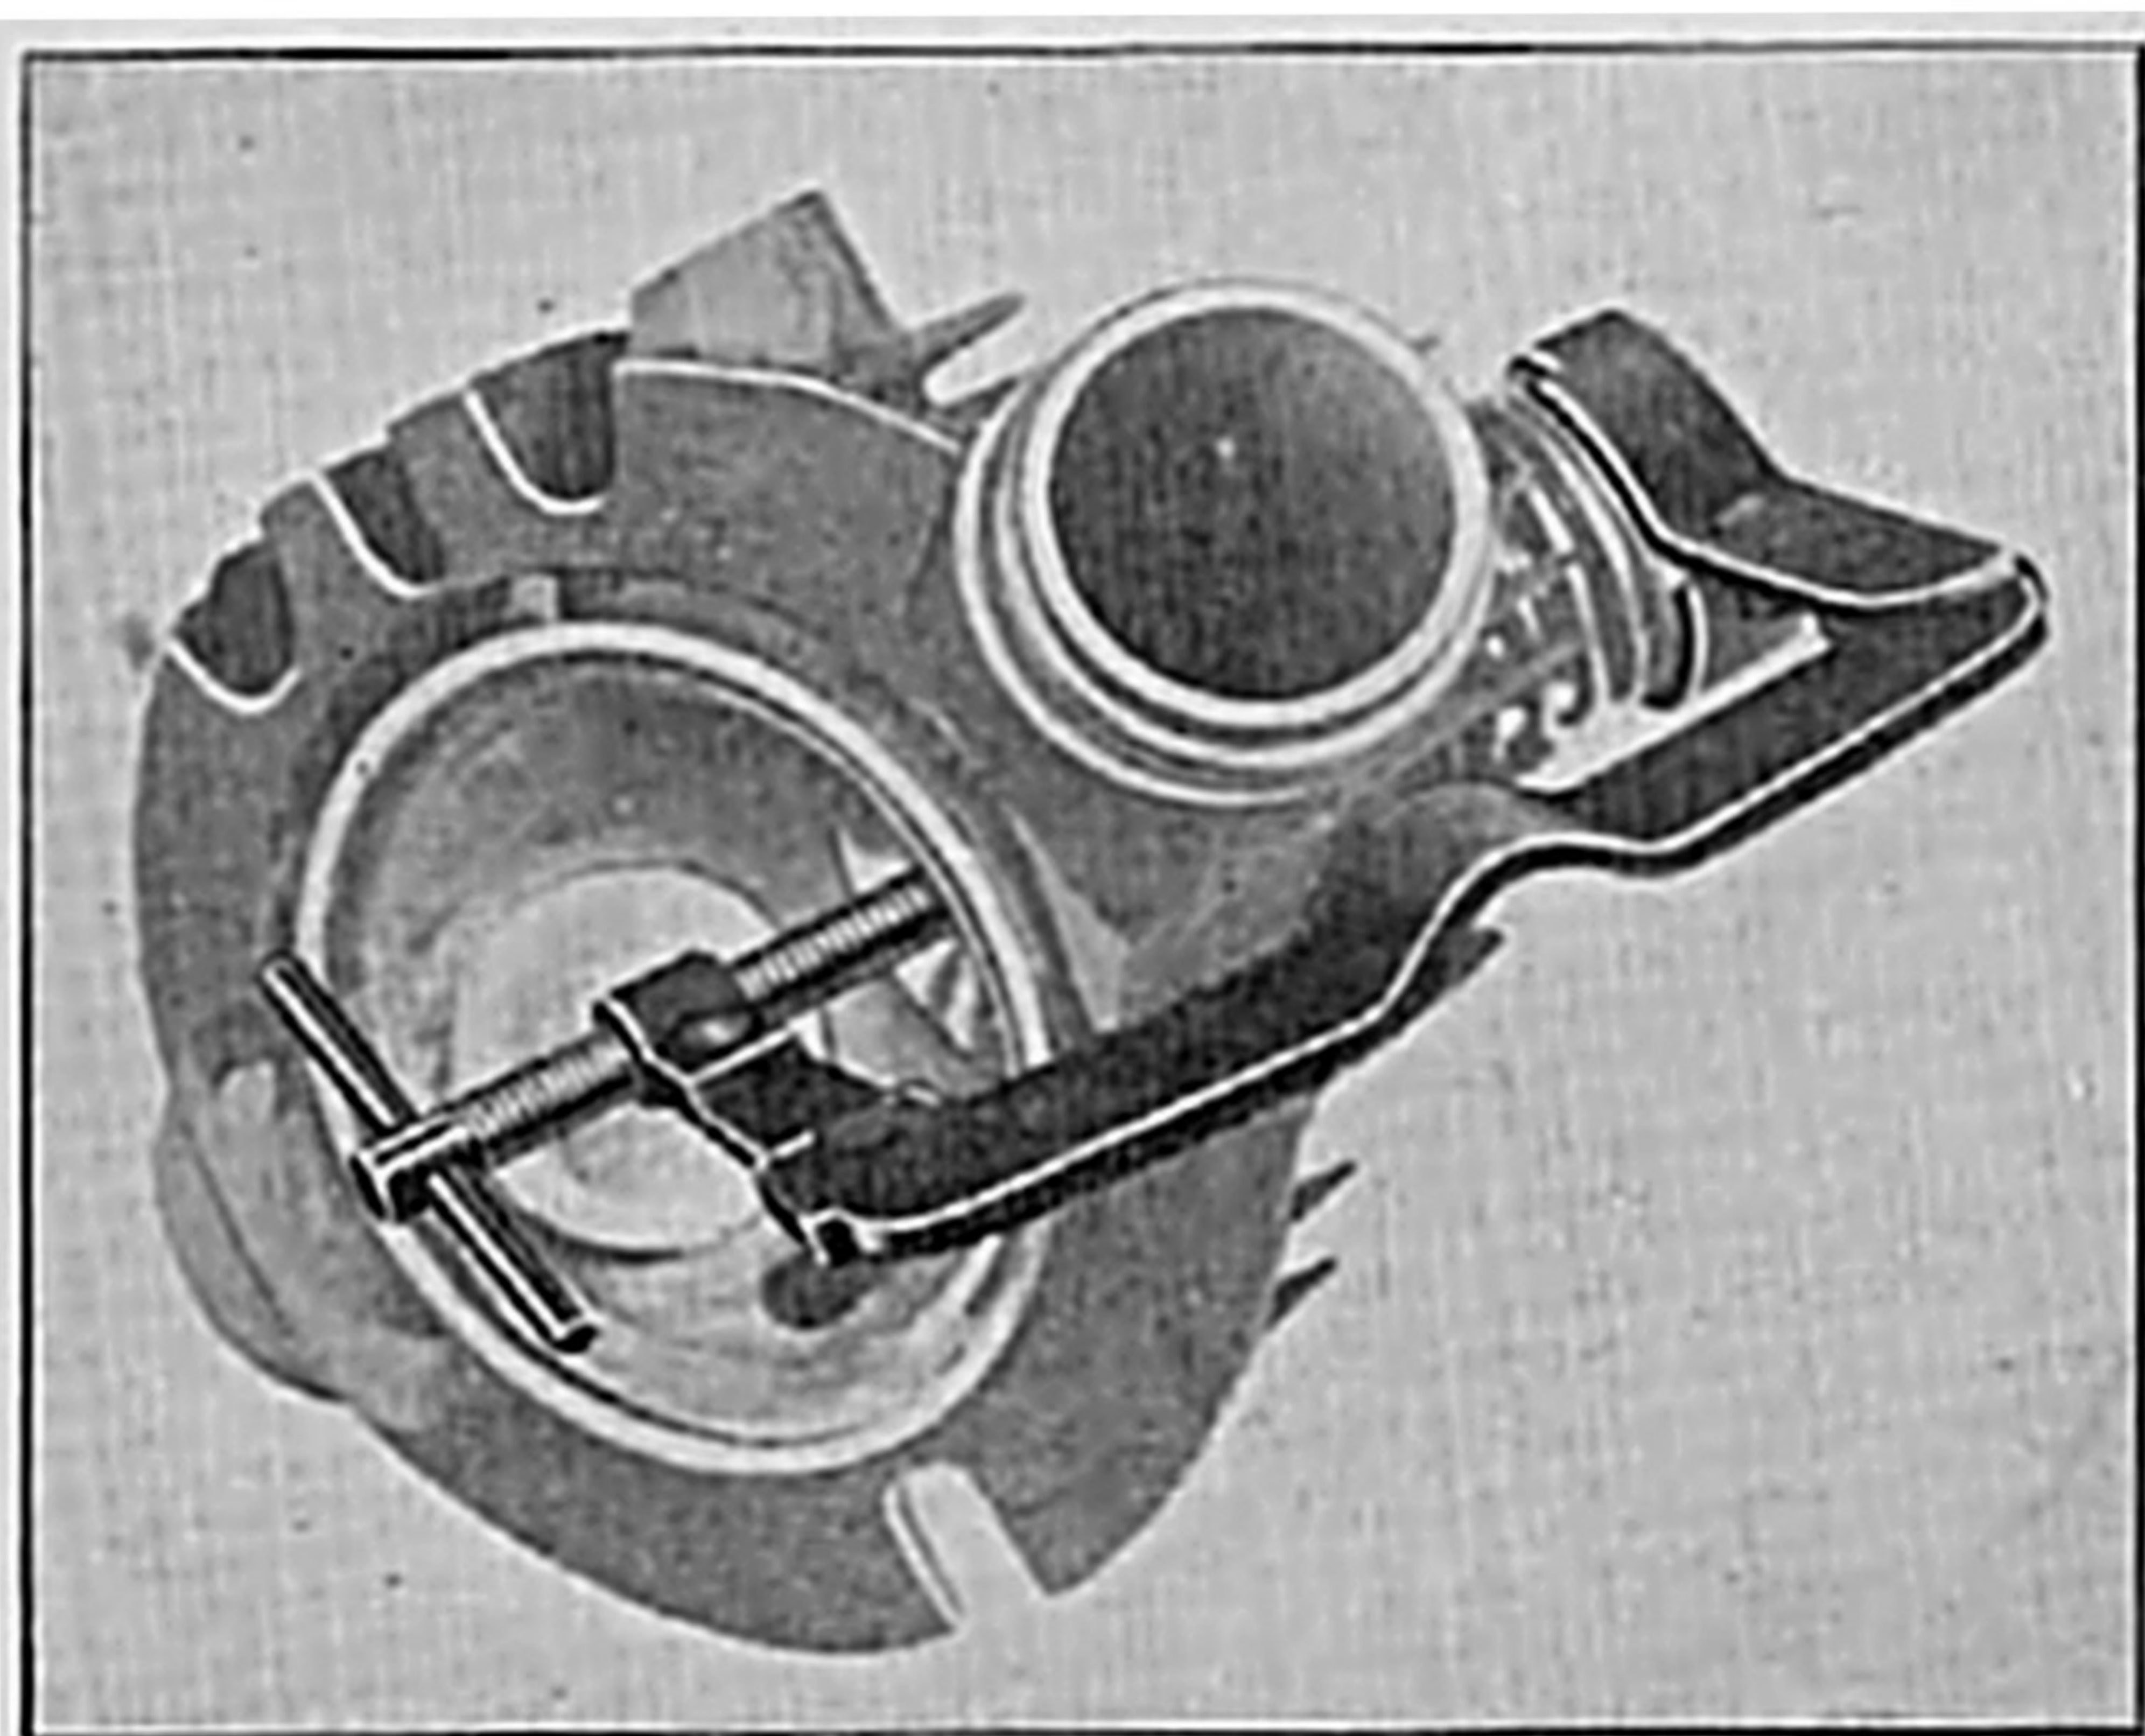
THE A.J.S. VALVE EXTRACTOR
